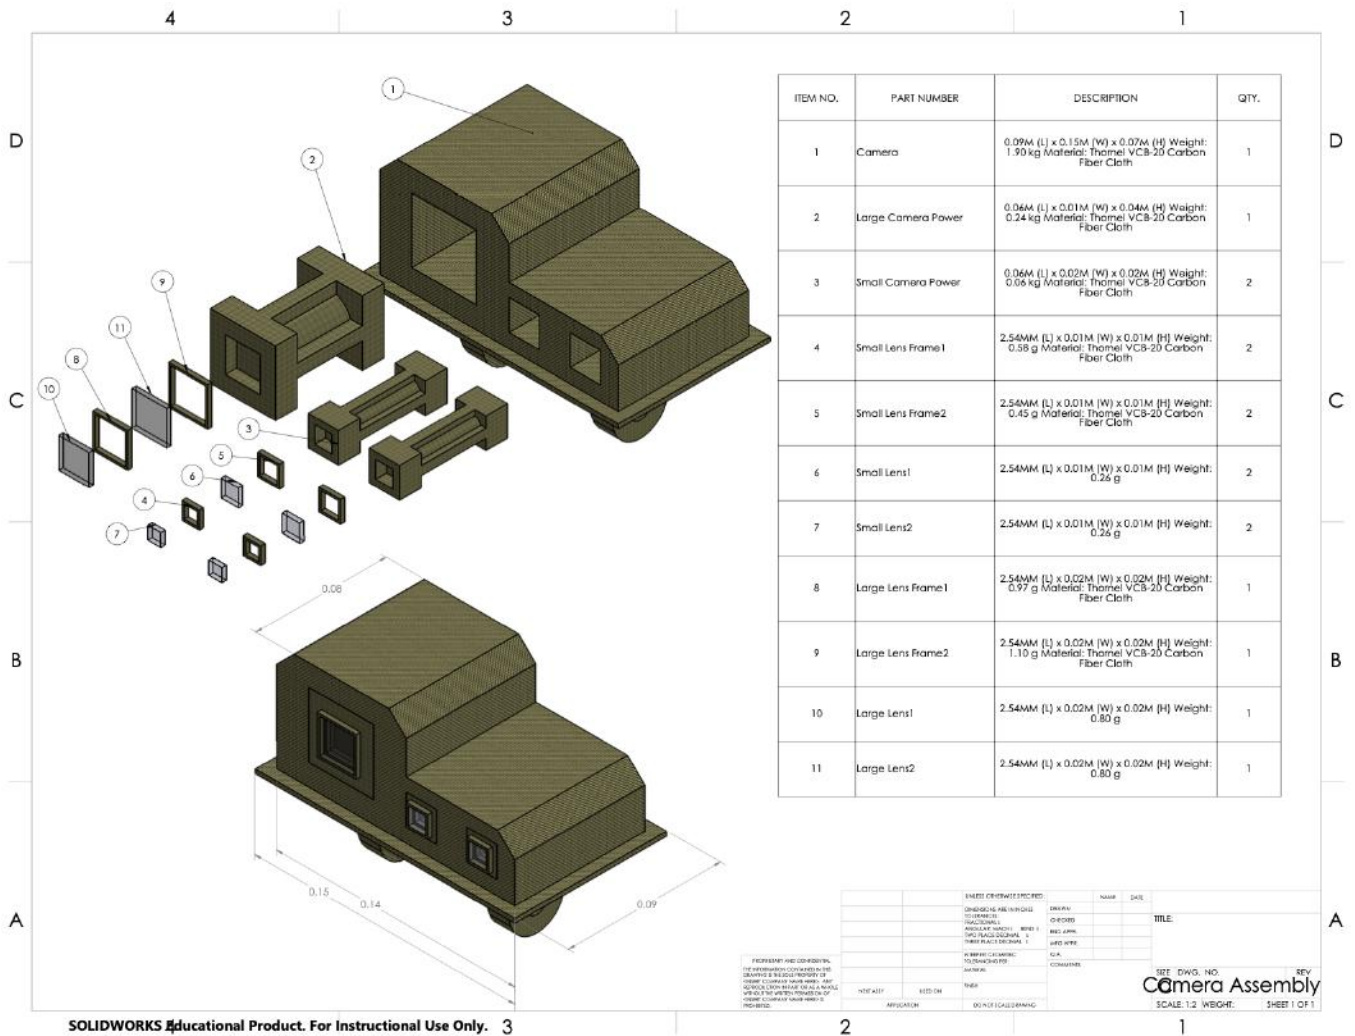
Solidworks CAD 3D model of ARES-42 camera assembly
